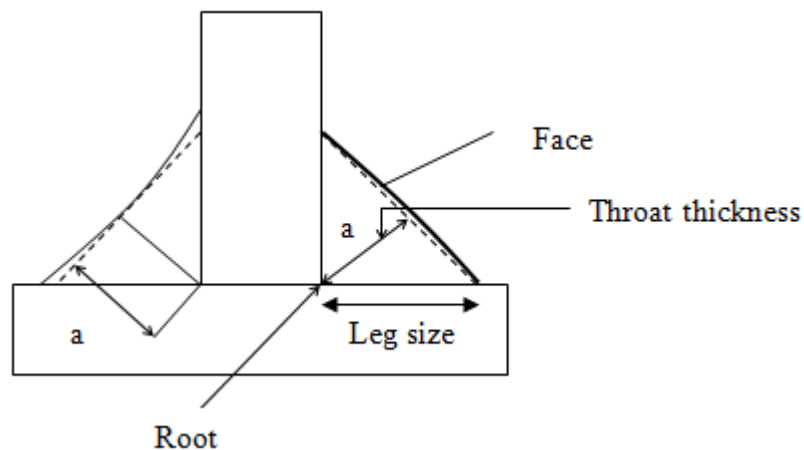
Throat thickness of a fillet weld based on EN 1993-1-8.
